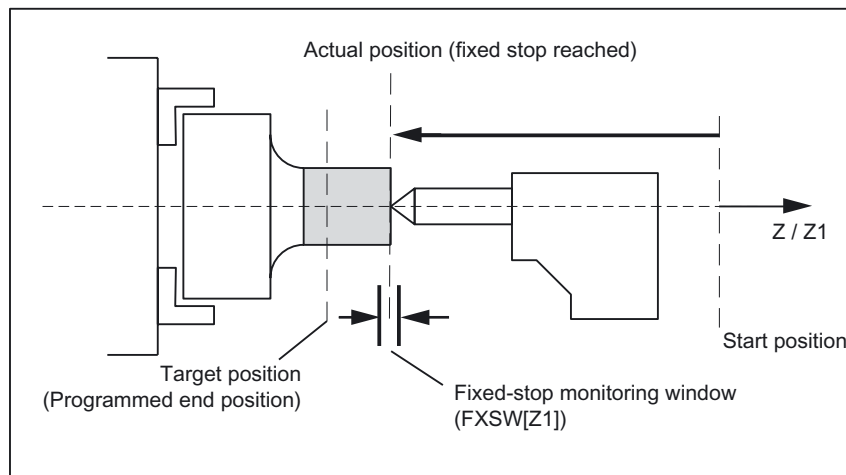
Example for travel to fixed stop, a quill is pressed onto the workpiece
